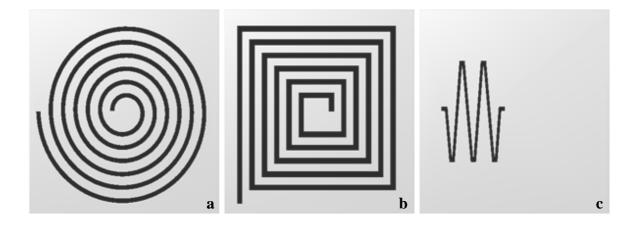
Three different cavity geometries of the testing mold. Spiral (a); Square spiral (b); Zigzag (c)
